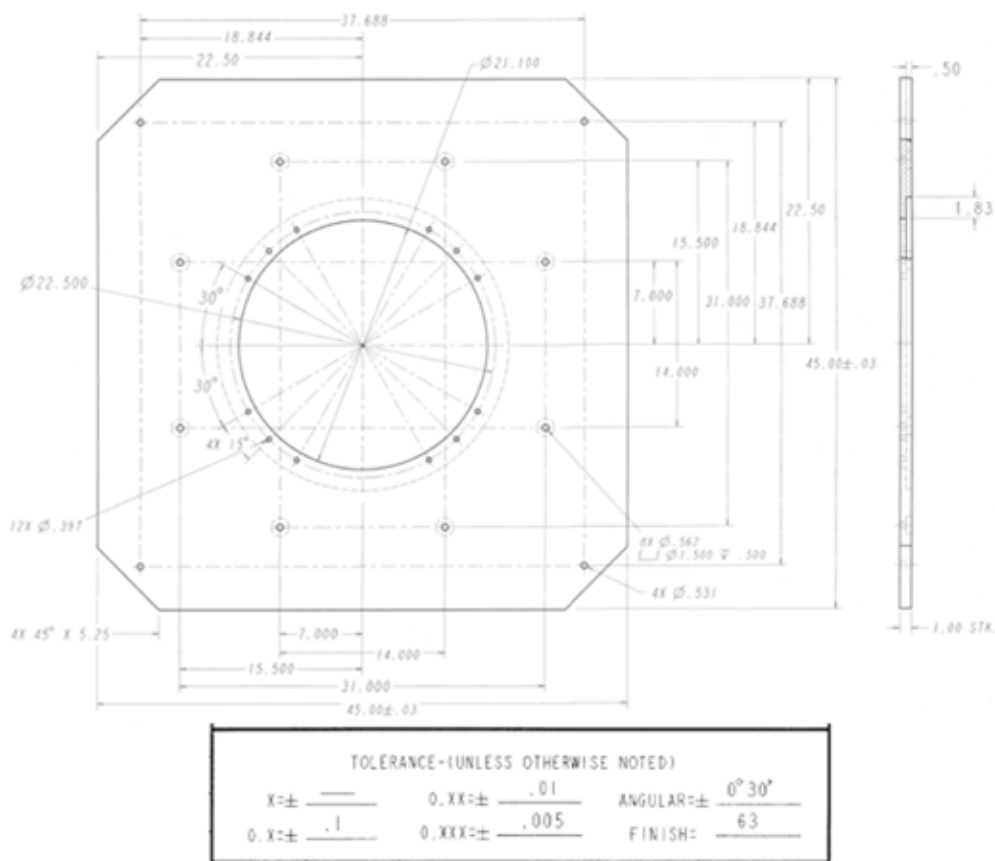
Engineering Drawing (128Y-270955-D4) of the Top Plate (Dimensions in Inches).
